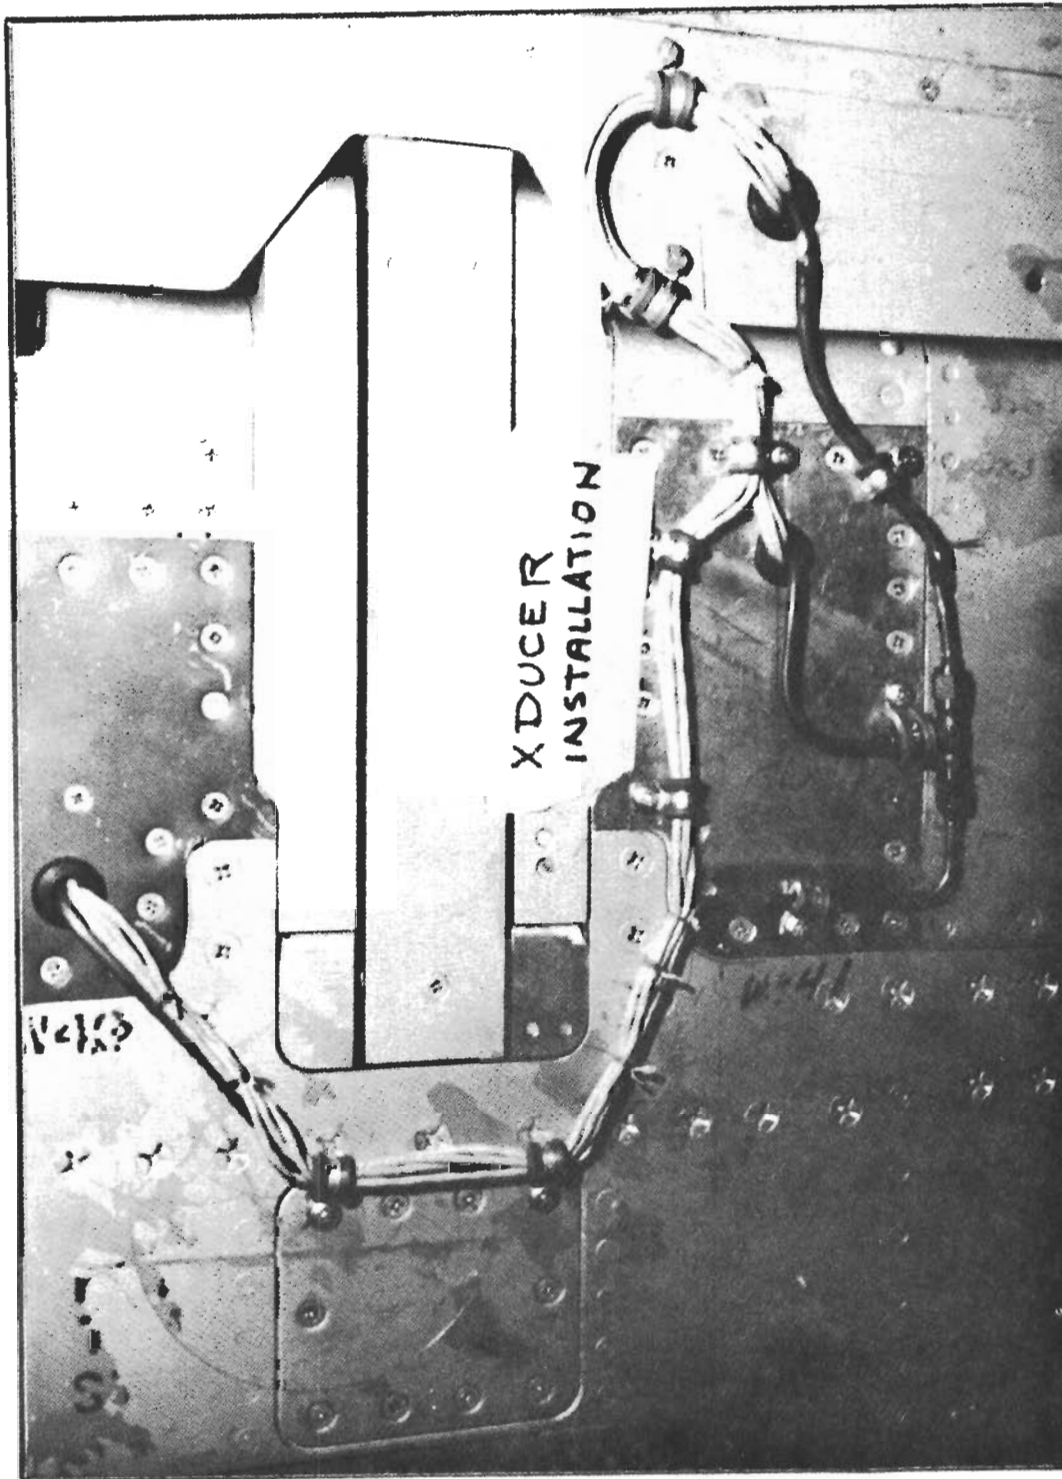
Plumbing and Wiring Details of Pressure Instrumentation on Bottom Surface of Left Wing Near Wing Station 125
